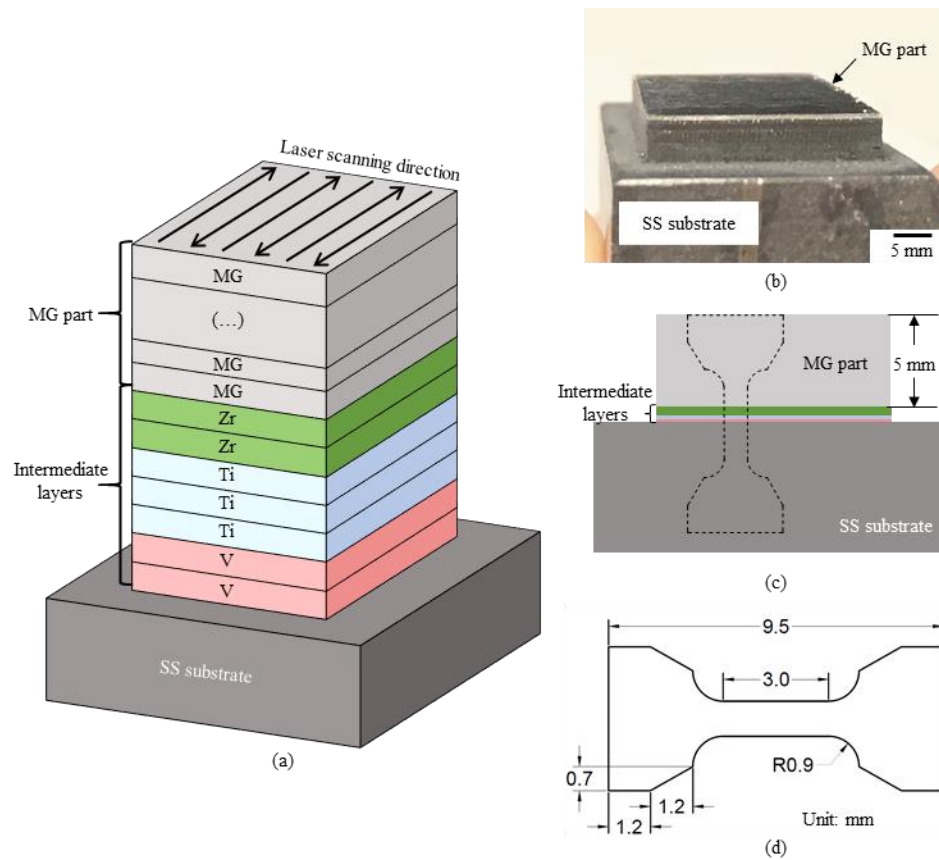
(a) Schematic showing the arrangement of the intermediate layers when printing a MG part on a SS substrate; (b) image showing a MG part printed on a SS substrate; (c) schematic showing how a tensile test specimen was extracted; (d) dimensions of the tensile test specimen. Note, (a) and (c) are not drawn to scale.
